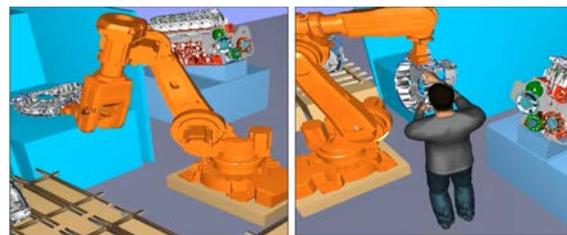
Illustration of a conceptual model of a collaborative assembly cell. The operator is responsible for guiding the robot to the correct location. The robot is used as a flexible lifting device [4].
